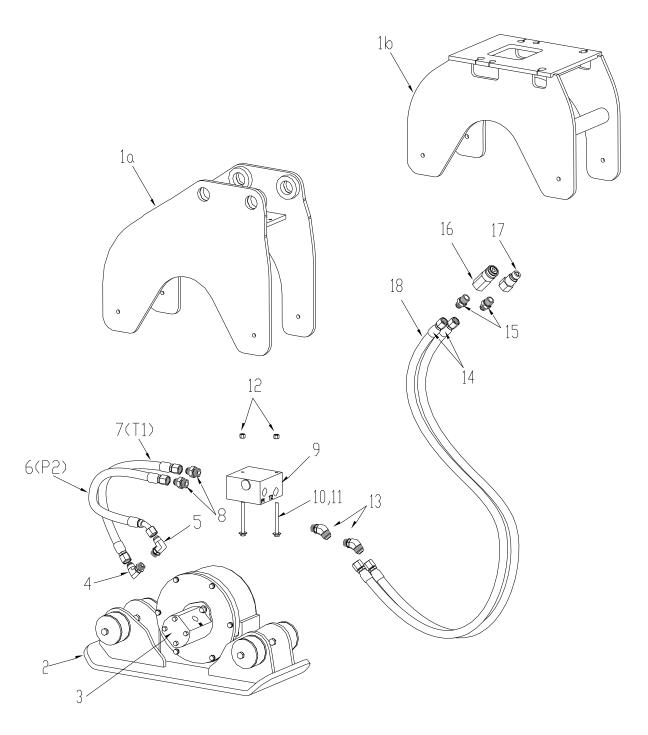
Model 300 & 300B Mounting Frame & Hydraulics
